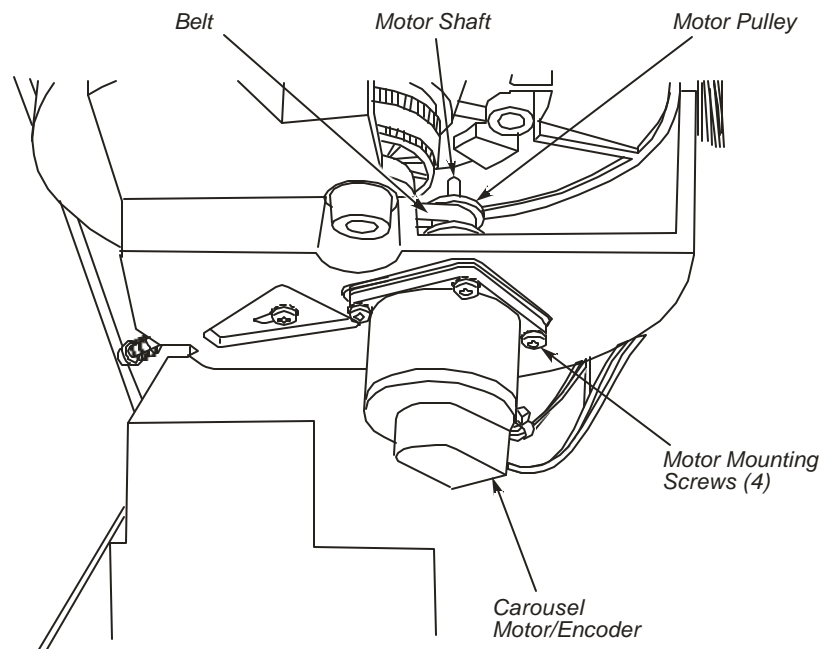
Carousel Motor, Motor Pulley, and Belt
